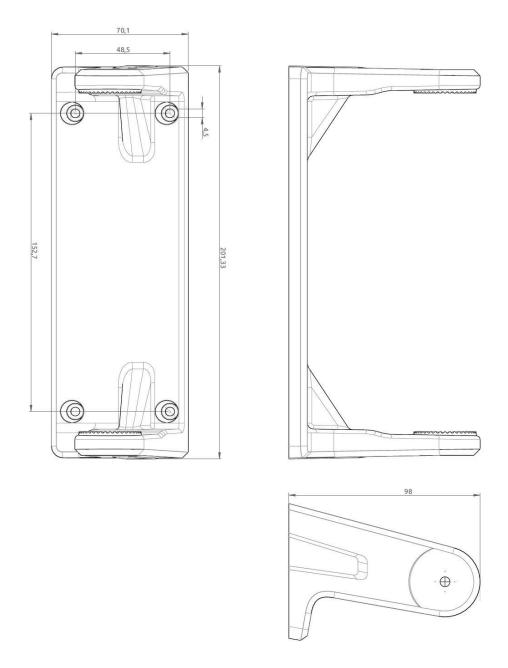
Outline Drawing: Bracket Mount, Control Unit
